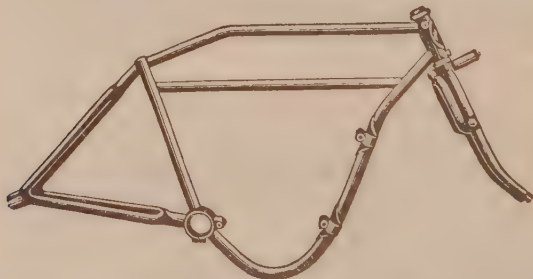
A motor cycle frame. The lower member is curved to conform to the shape of the crank case of the engine. The fork consists of two hinged pieces held in place by a spring forming a shock absorbing device.
